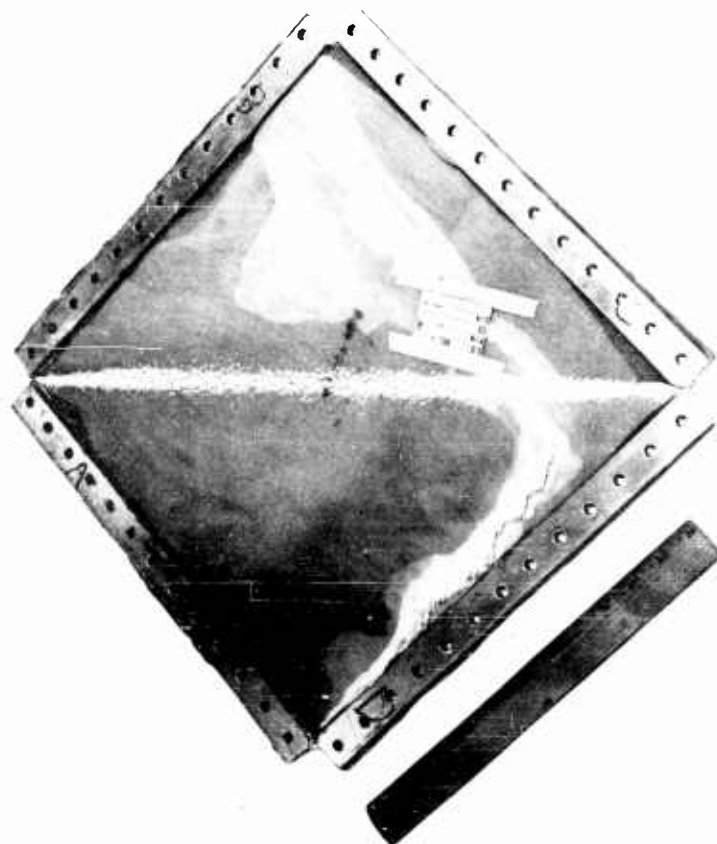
TYPICAL FAILURE OF FLAT LAMINATED SHEAR PANEL
